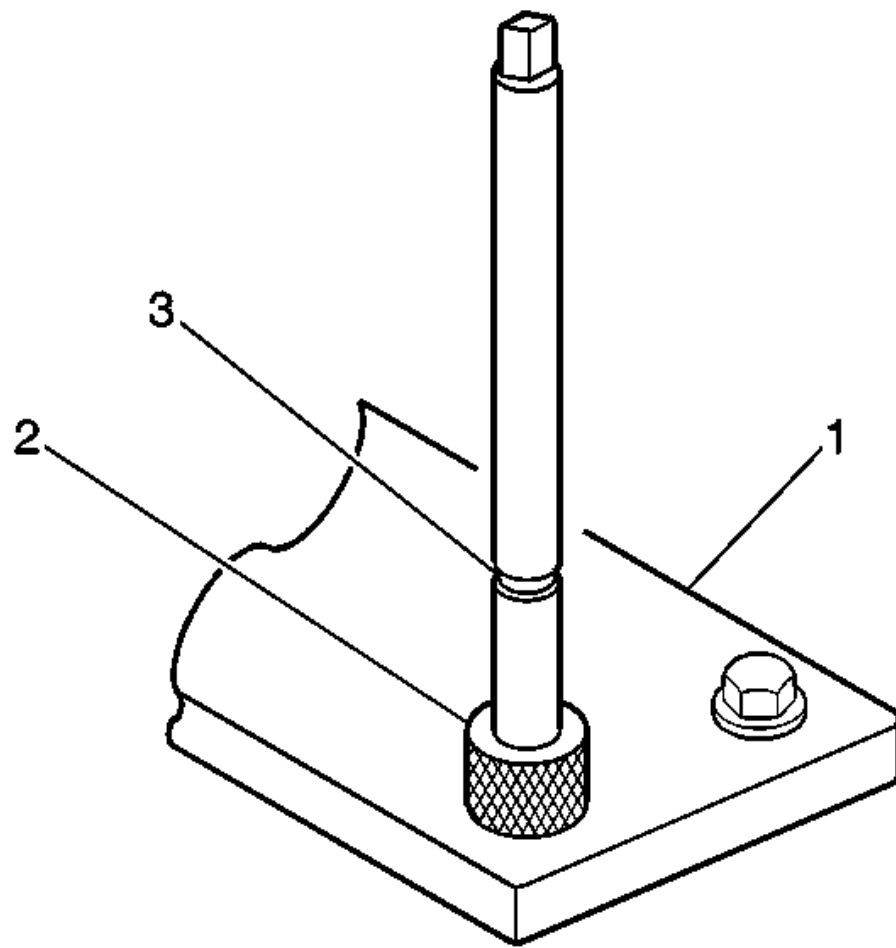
Fixture Plate, Drill Bushing And Tool Marking
